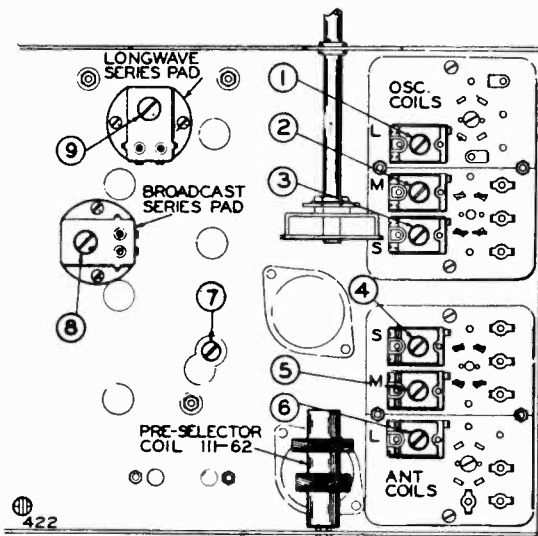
BOTTOM VIEW SHOWING TRIMMERS
